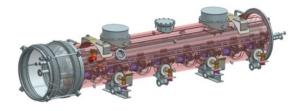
View of the XFEL 3.9 GHz cryomodule full equipped with cavities. Power couplers are alternated to reduce kicks to the beam.
